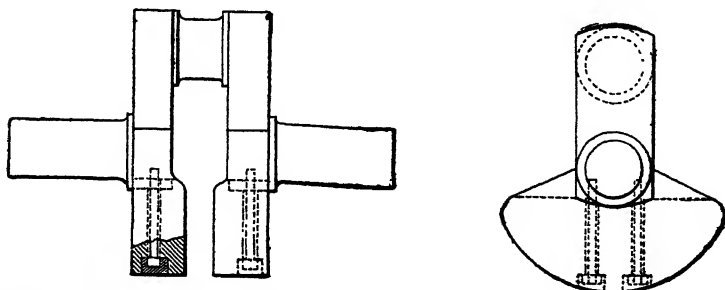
Counter-balanced crank, bolts or stud-bolts and nuts for each weight.
